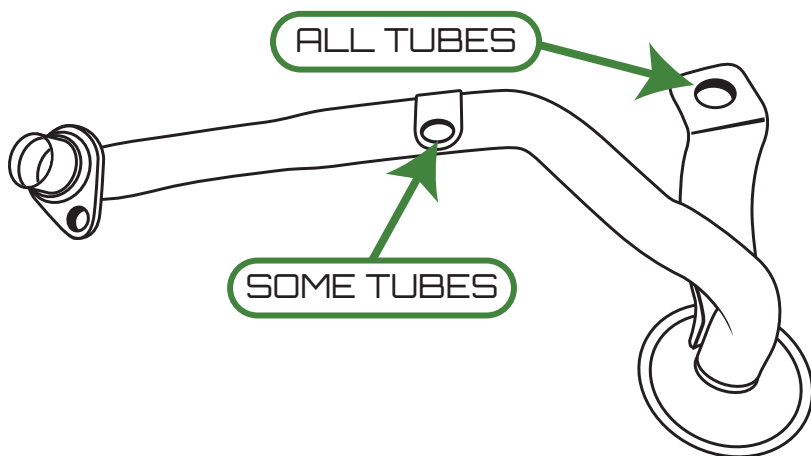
Hole(s) to Enlarge on the Pickup Tube (Screen)
